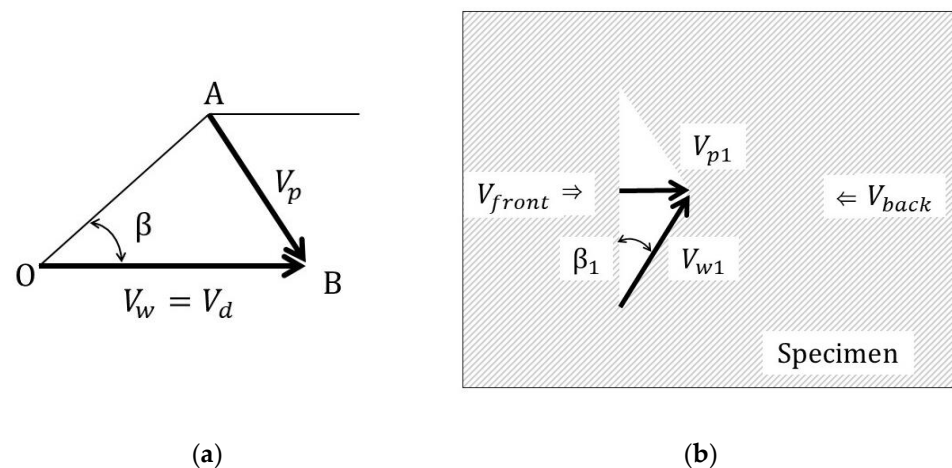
Geometrical analysis (a) Typical explosive welding, (b) proposed structure (sample 2).
